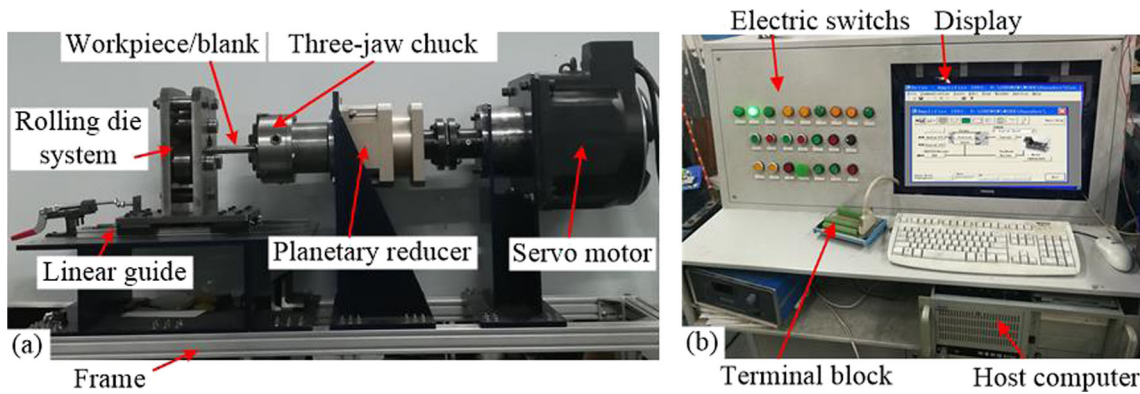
The formed equipment of thread shaft: a the mechanical part of formed equipment and b the control part of formed equipment.
